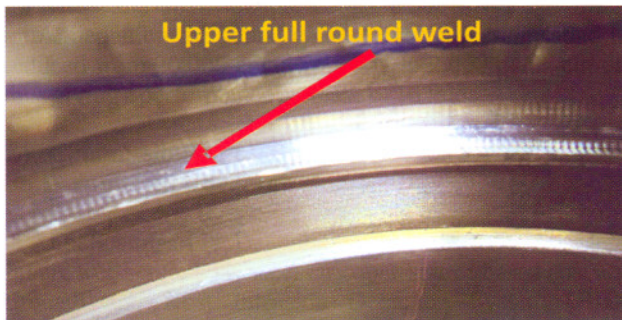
A View of laser welding of inter-junction of inner bellow ply & insert ring.
